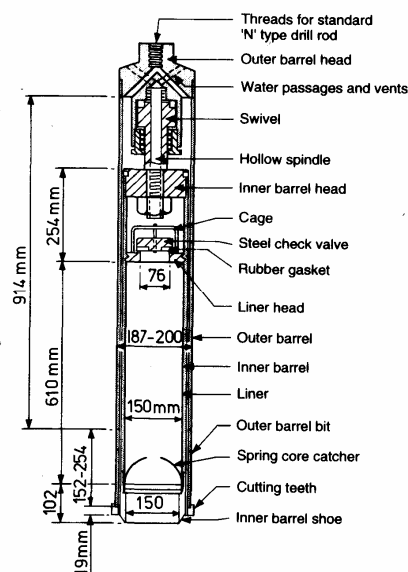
Denison triple-tube corebarrel (Johnson 1940).
